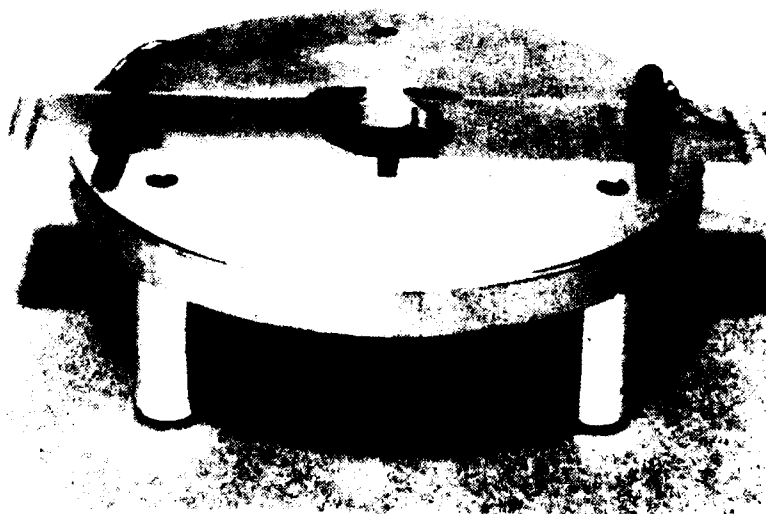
Alignment Fixture for Plaster Mold Assembly
